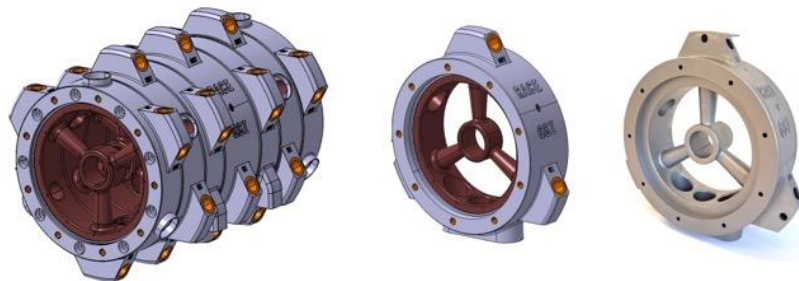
From left to right: mechanical design of the 704.4 MHz SHAPER cavity; drawing of a SHAPER cavity segment; a SHAPER cavity segment printed in stainless steel 316L.
